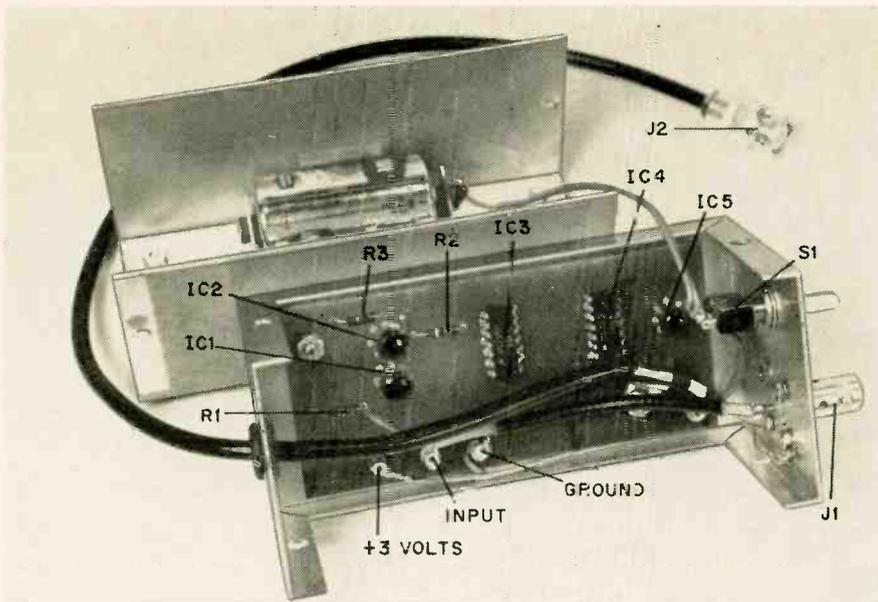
Circuit board should be just a little smaller than the aluminum box you use. Mount the board on standoffs. Carefully recheck pin indentifications.
